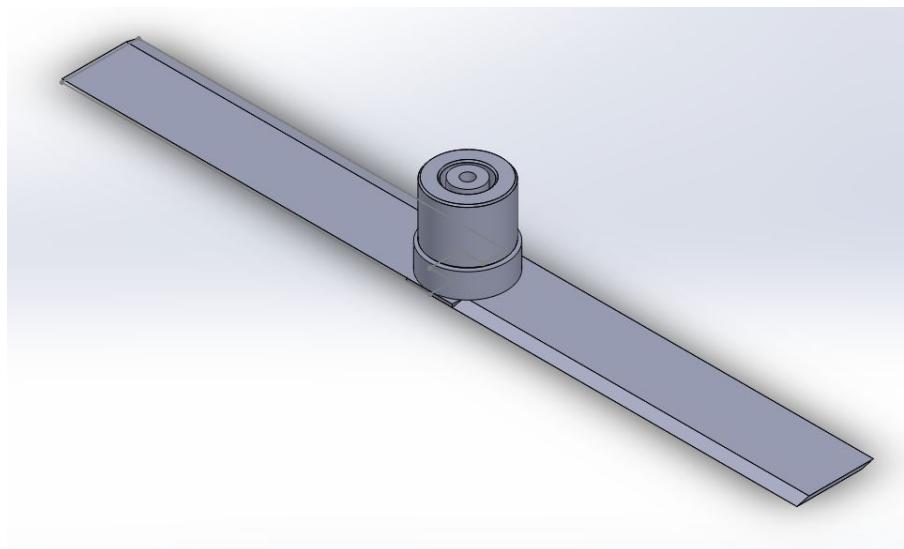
Isometric view of the blade assembly which includes the blade, blade adapter and blade bushing
